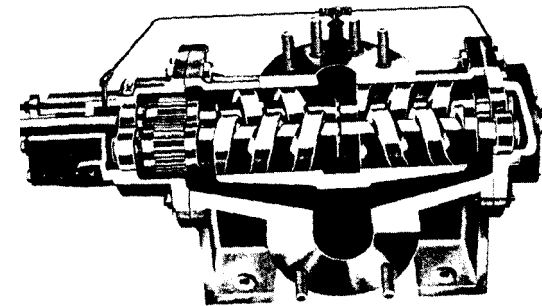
Twin-screw rotary pump with internal bearings and timing gears. Courtesy Ingersoll-Dresser Pump Company.
